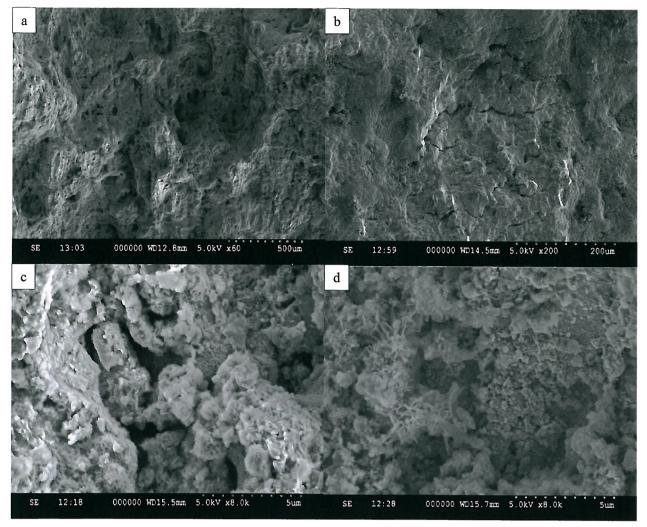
a: SEM image at the final fracture, showing a dimpled fracture surface. b: SEM image towards the final fracture showing micro cracks. c-d: SEM image of corroded and contaminated fracture surface.
